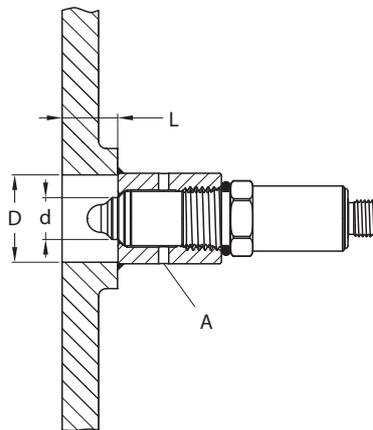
Avoiding dead space and installing a leakage hole (A)
